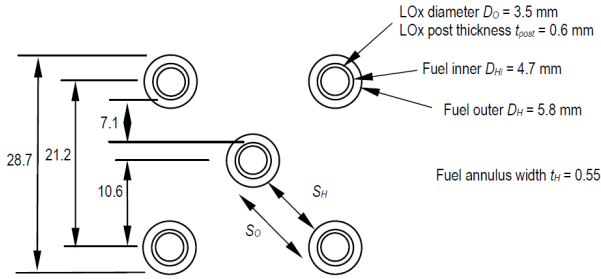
BKH section and injection plane with relevant dimensions[86]
